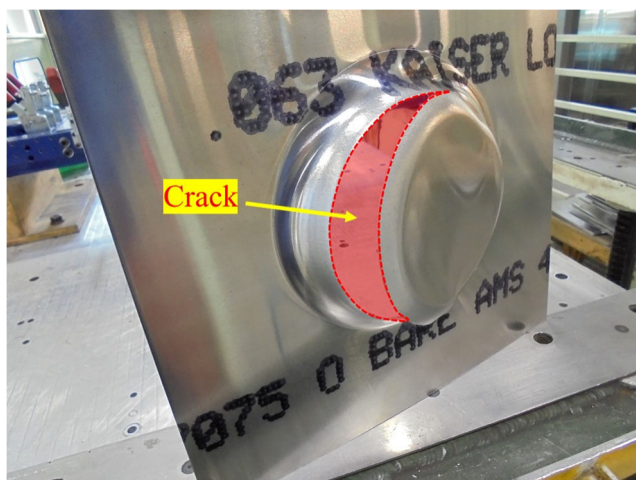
Crack that occurred in the single-pass test of the circular coneshaped part.
